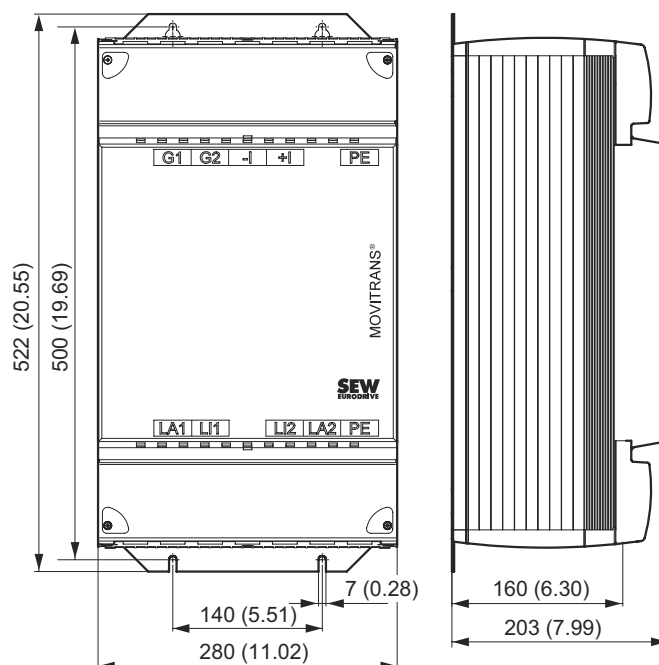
Dimensions for MOVITRANS® size 4, dimensions in mm (in)
